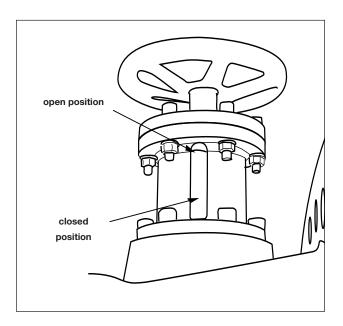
VAG EKN® Butterfly Valve with UVV safety interlock
